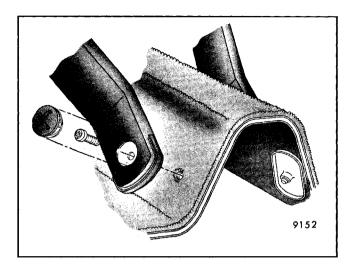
Screw-in Type Seat Belt Sleeve Plug Installation
